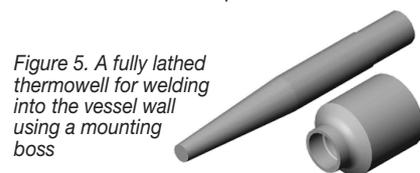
A fully lathed thermowell for welding into the vessel wall using a mounting boss
